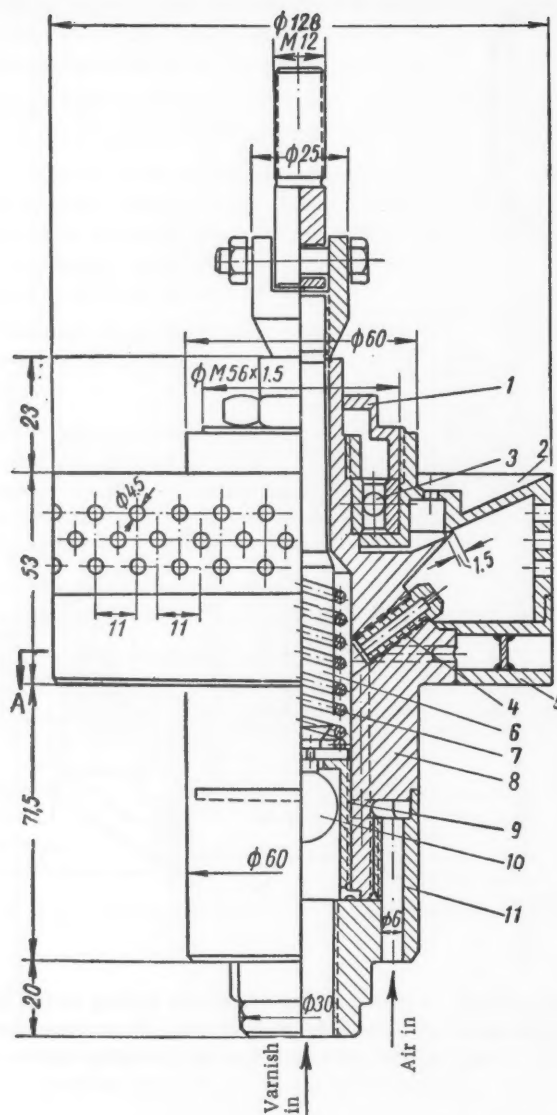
Spray for lubricating molds: 1) thrust nut; 2) disc-atomizer; 3) ball bearing; 4) nozzle; 5) turbine; 6) valve push rod; 7) spring; 8) spray housing; 9) valve saddle; 10) ball; 11) varnish and air receiver.
